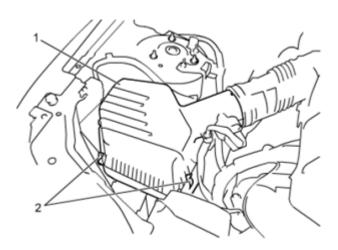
Identifying Air Cleaner Components With Torque Specifications Courtesy of SUZUKI OF AMERICA CORP.
